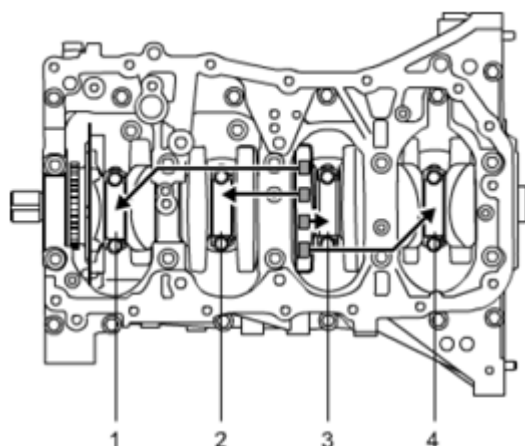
Checking Connecting Rod Big-End Inside Diameter
